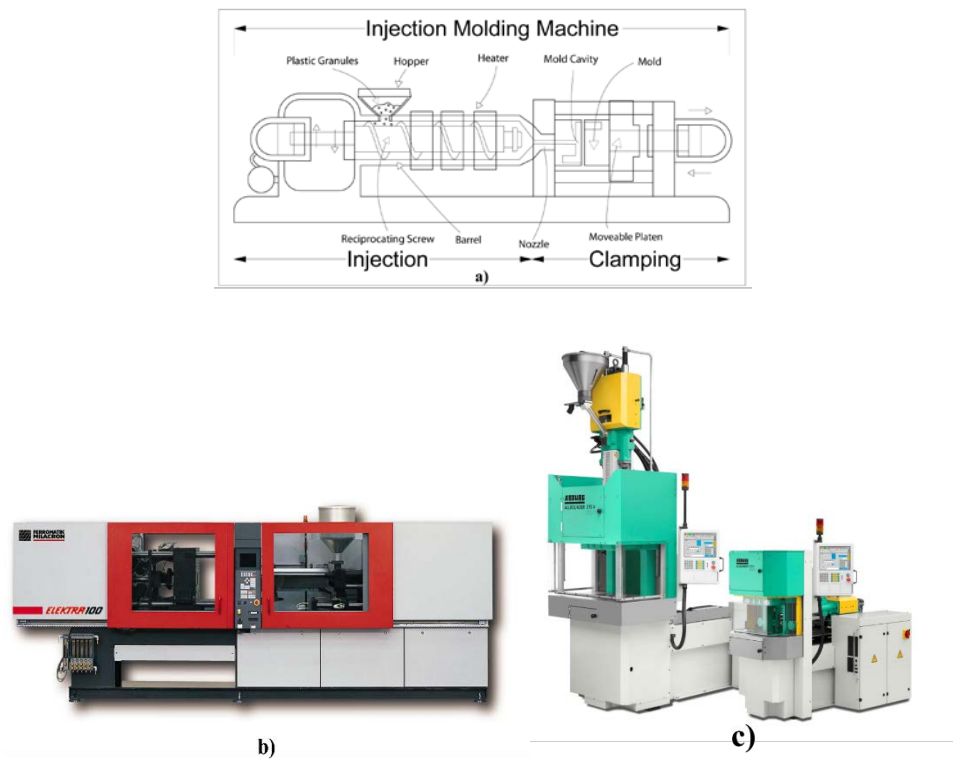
a) Schematic of an Injection molding machine, b) Horizontal Injection molding machine, c) Vertical injection molding machine.
